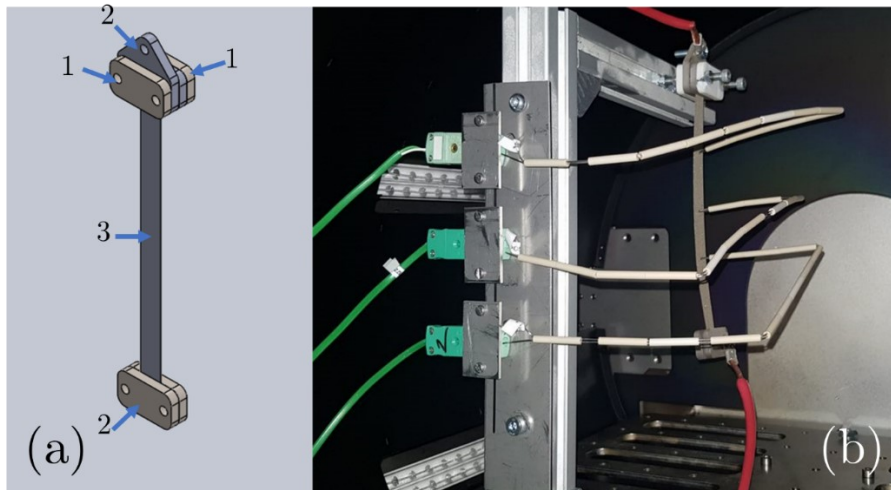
(a) CAD model of the SLM test strip in the test assembly showing 1-the Machor ceramic tabs, 2 - the metal tabs and 3 - the SLM sample and (b) a photo of the test assembly in the hatch vacuum chamber
